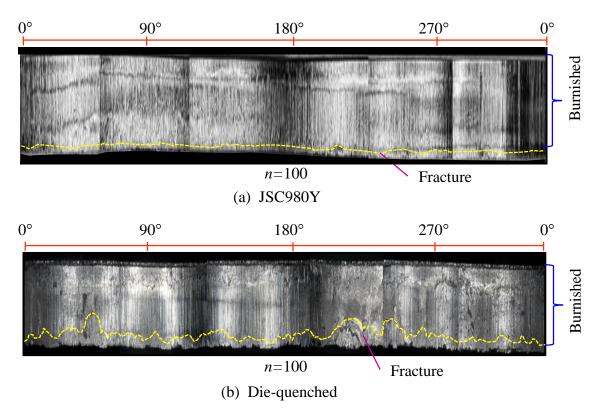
Surface of sheared edge of (a) JSC980Y and (b) die-quenched steel sheets for n = 100.
